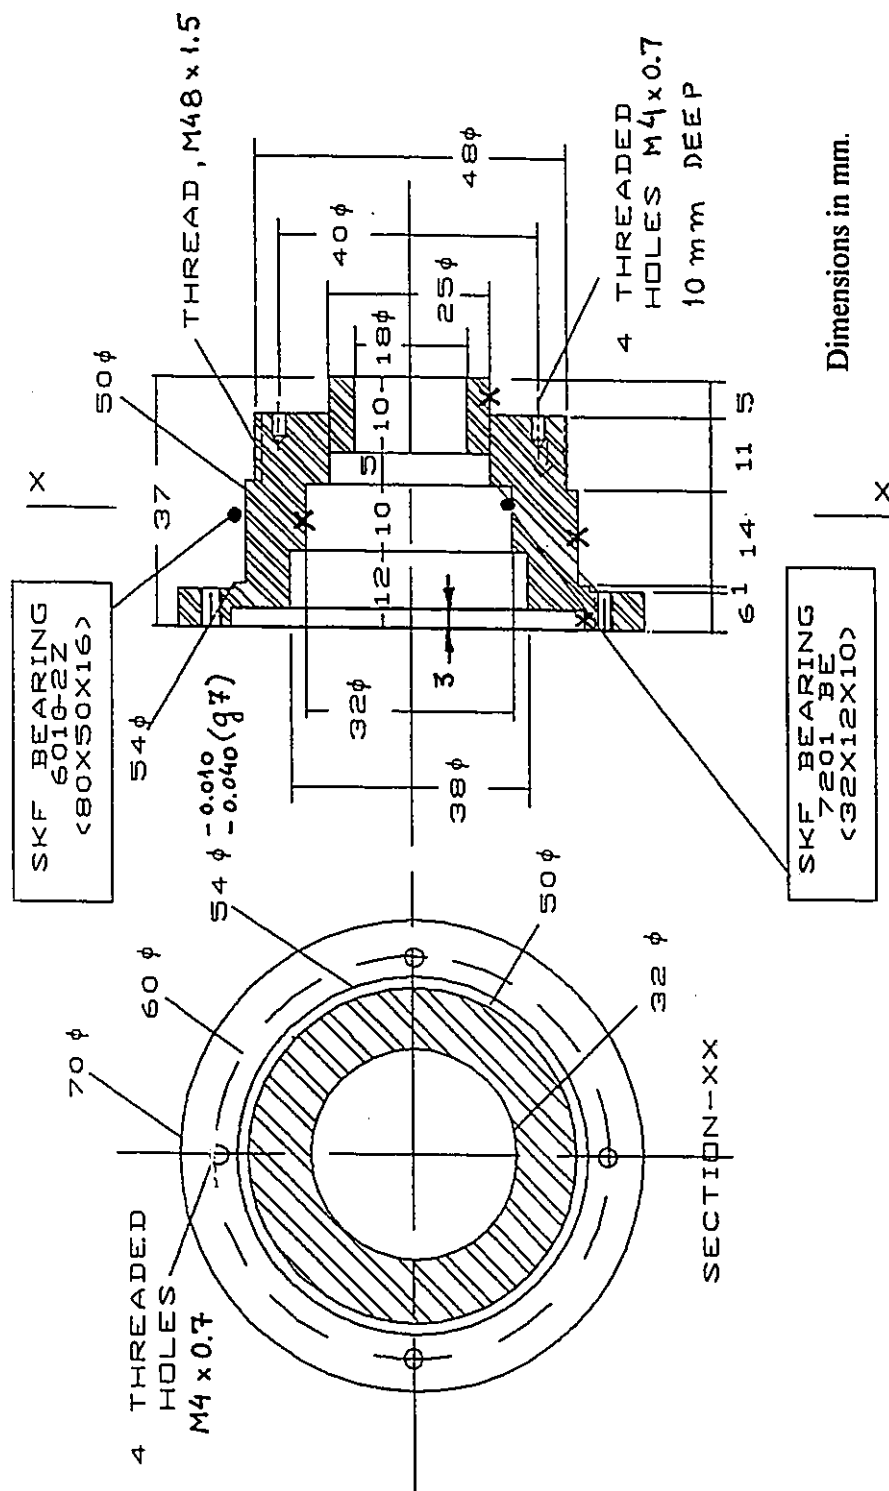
Part no.5 - Right spacer and bearing housing for joint 1
